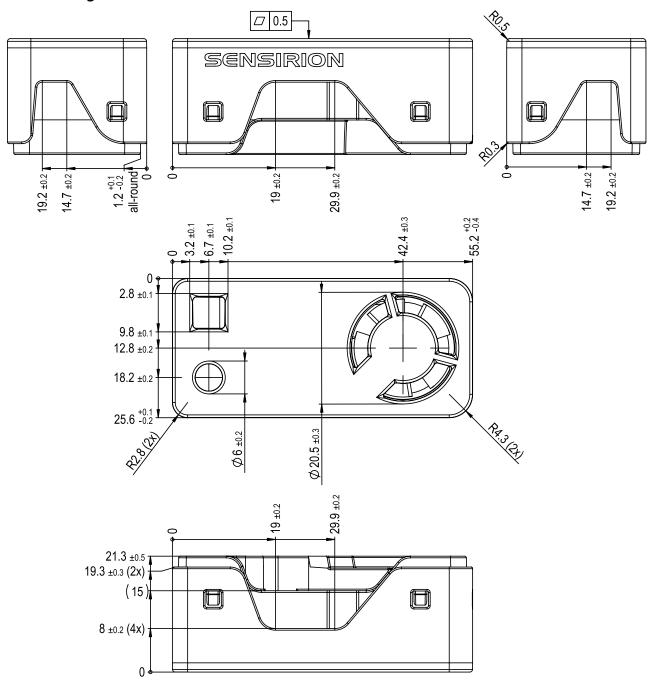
Technical Drawing of the SEN6x platform. All dimensions are in millimeters
